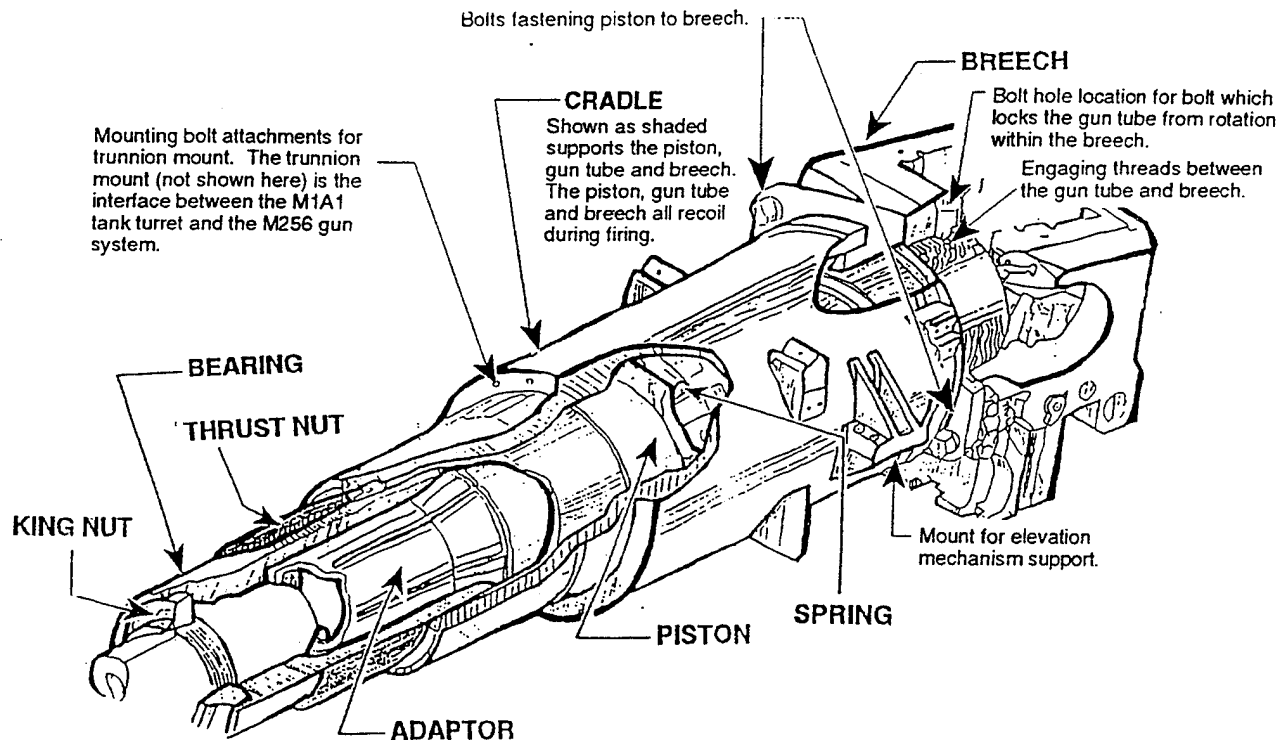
Cutaway view of the M256 120-mm gun recoil system.
